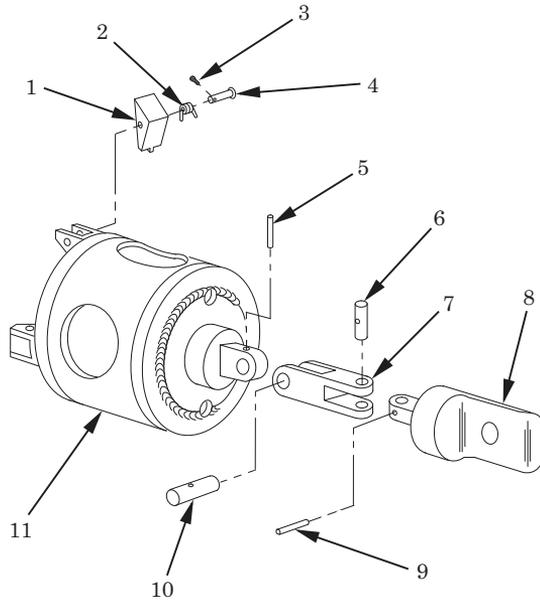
Disassembly/Assembly of Cartridge Extractor.
